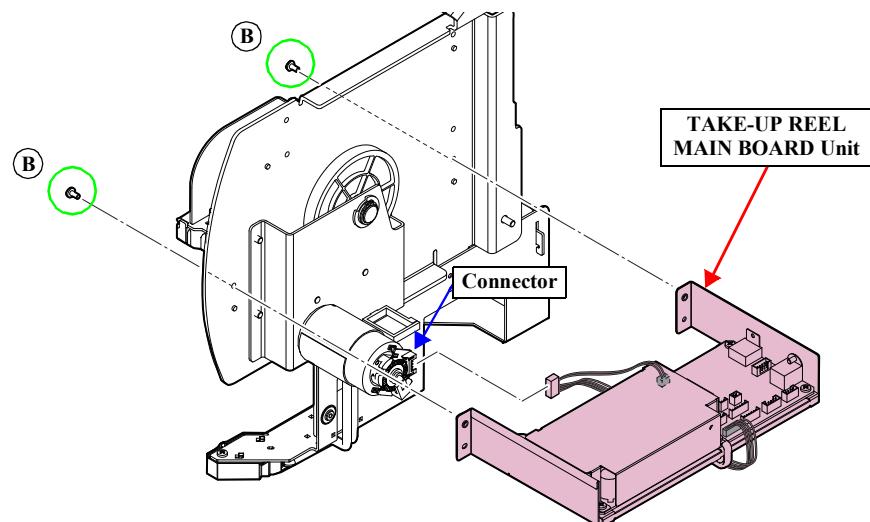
Removing the TAKE-UP REEL MAIN BOARD Unit
